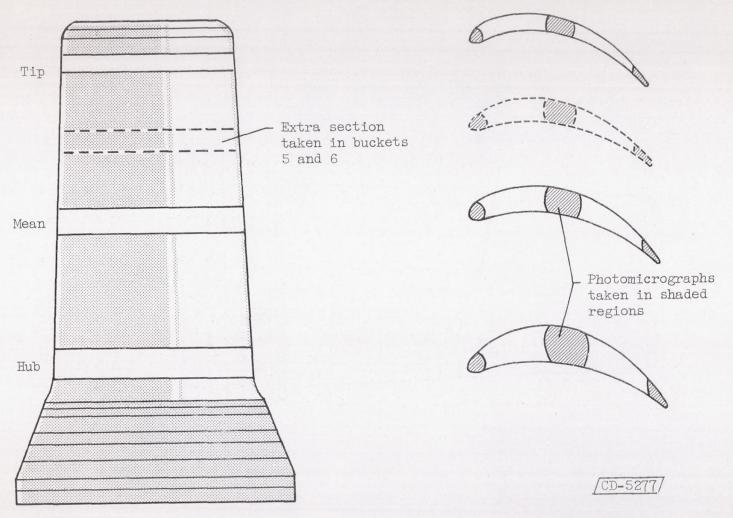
Sketch showing how buckets were sectioned and inspected.
